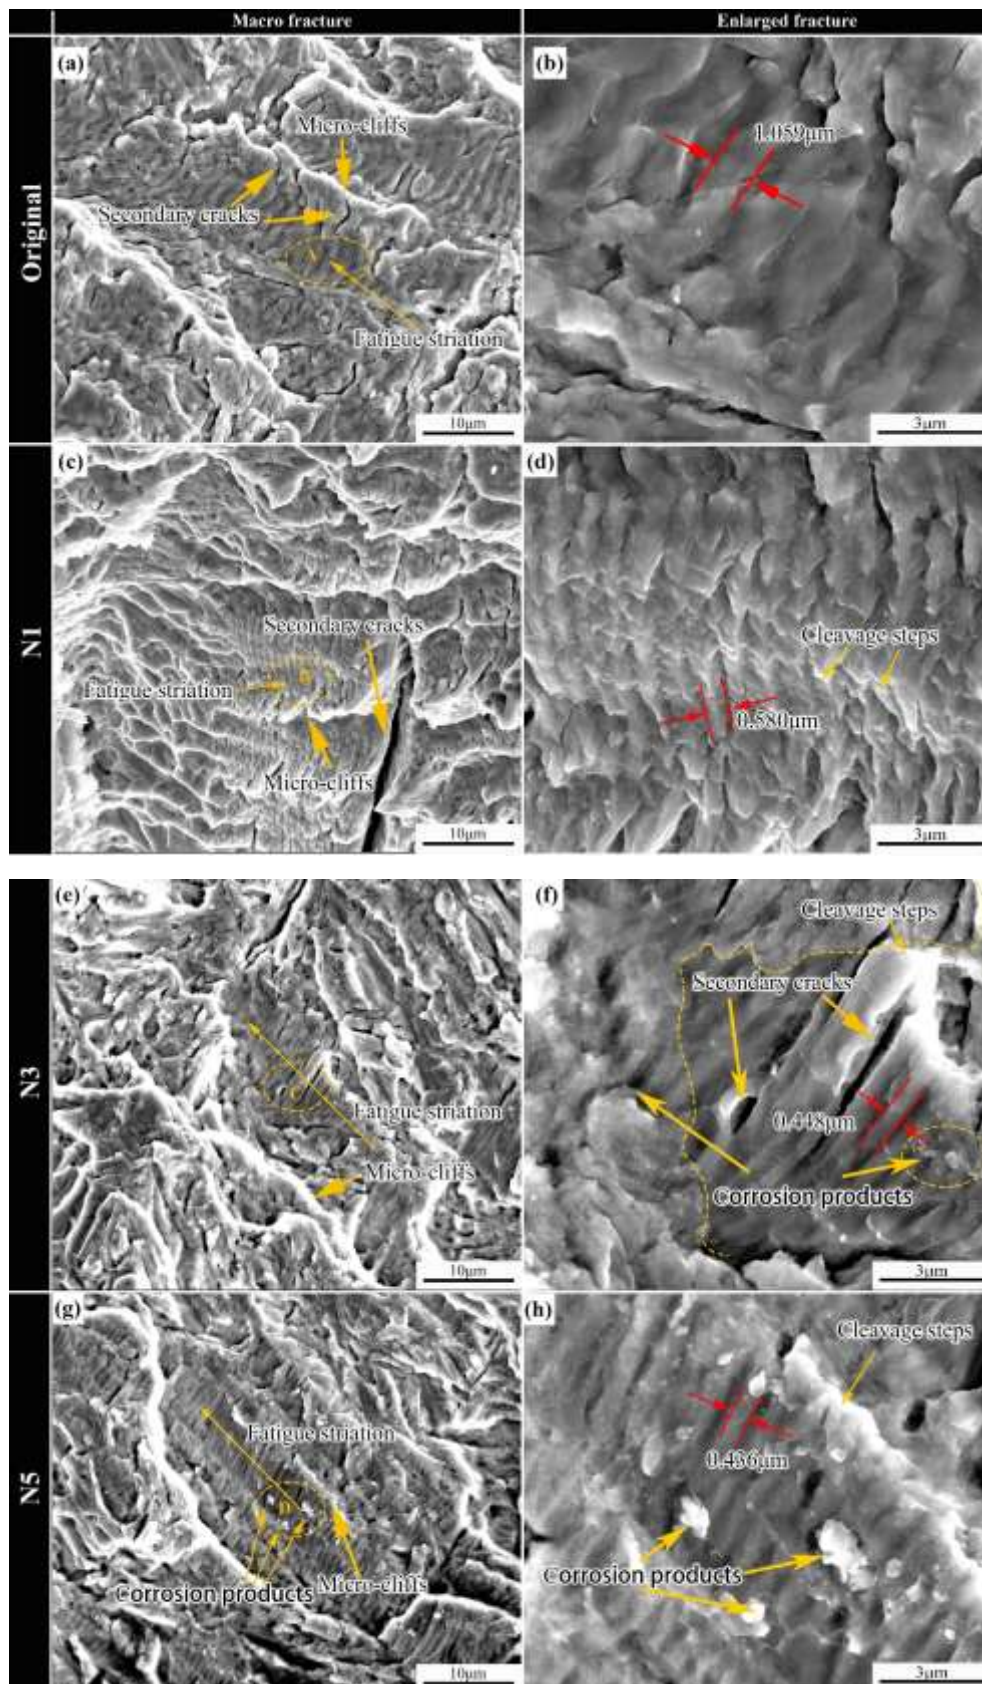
Morphology of corrosion fatigue propagation zone of welded joints.
